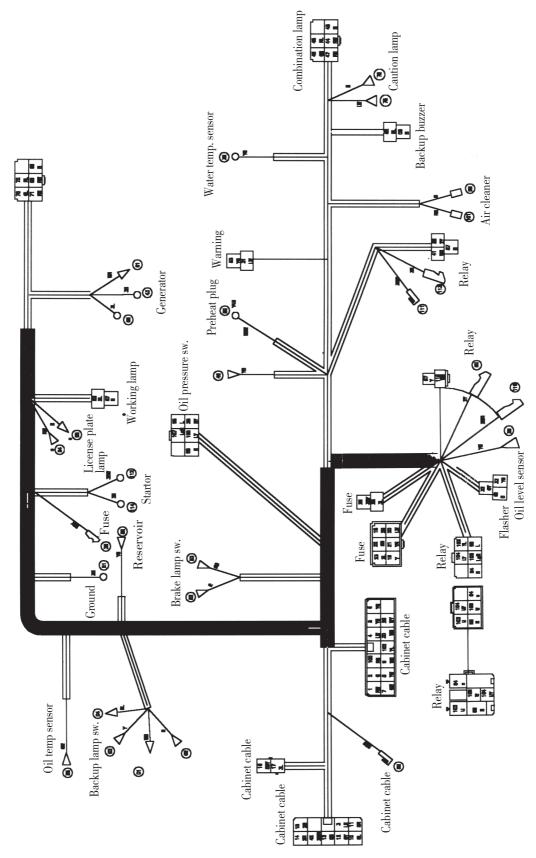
Engine wire harness. CPCD50-70-W -34-
